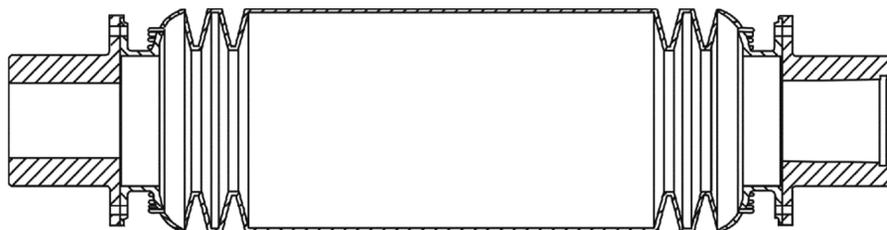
Principal design of elastic coupling suggested by D.J. Lawrie et al
